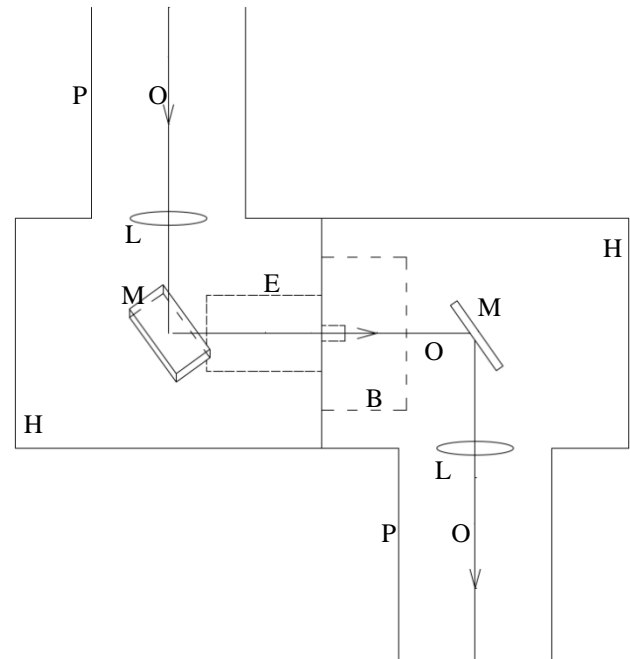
Detail of a joint between the neighboring members of a manipulator. O – optical ray, M – mirror, L – lens, E – electric servo motor, B – bearing, P – pipe body of the member, H – head end of the member. Some elements are not shown in the drawing because of simplicity.
